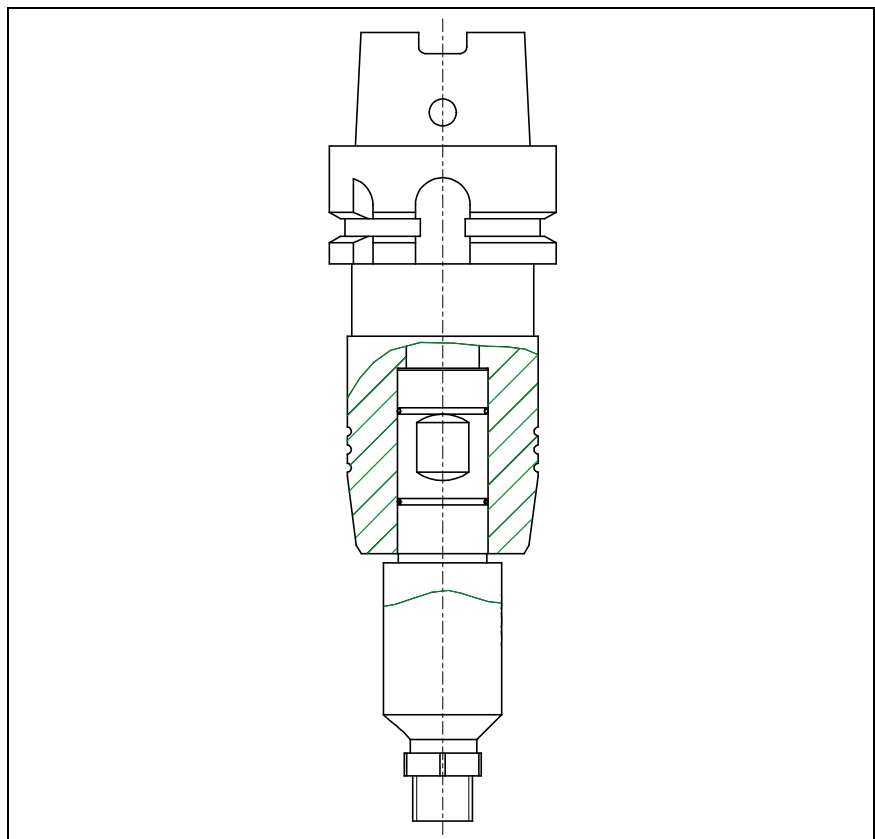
Sectional view of the GSW-V clamped in the TENDO
